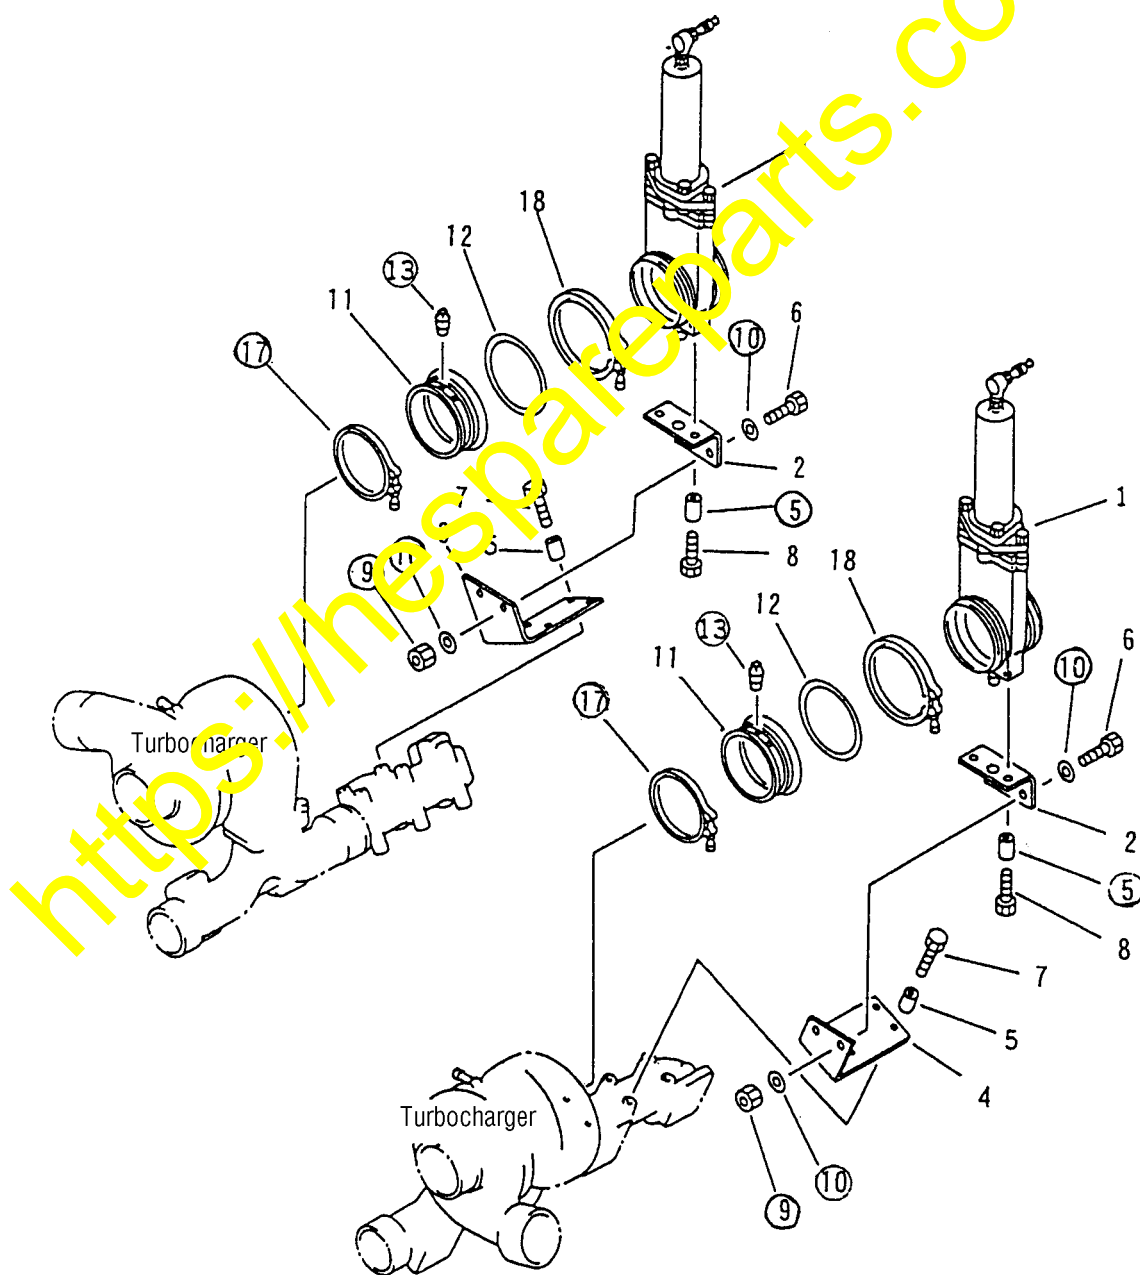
Schematic diagrams for the engine parts which need to be removed for this modification
